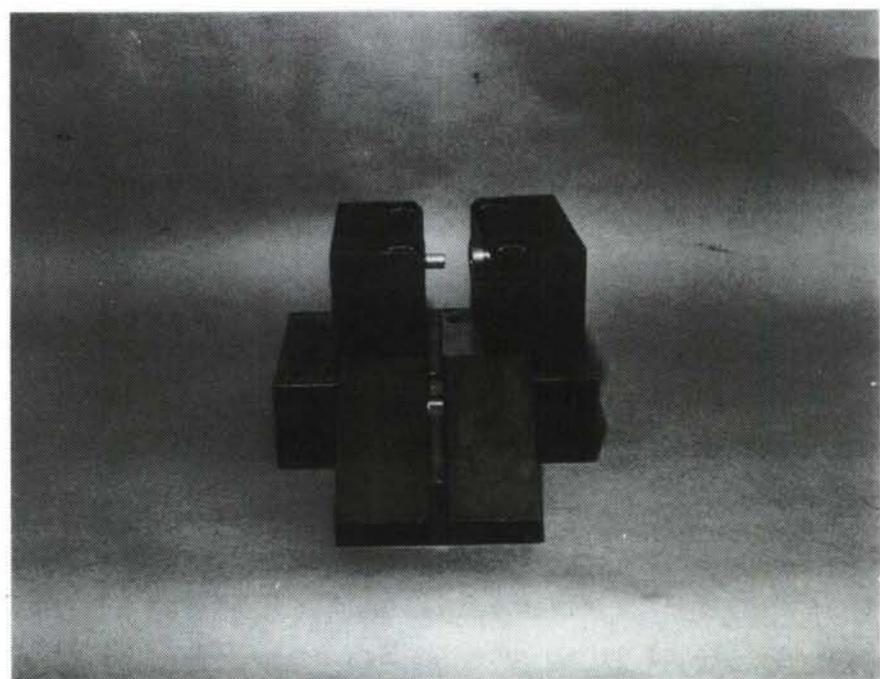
Double Shear Jig with Right Specimen Holder Moved to Right
